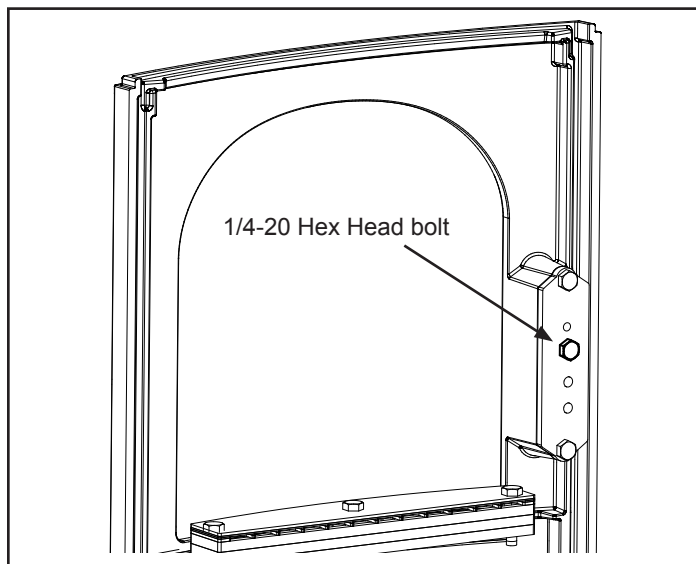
Loosen 1/4-20 Hex head Bolt
